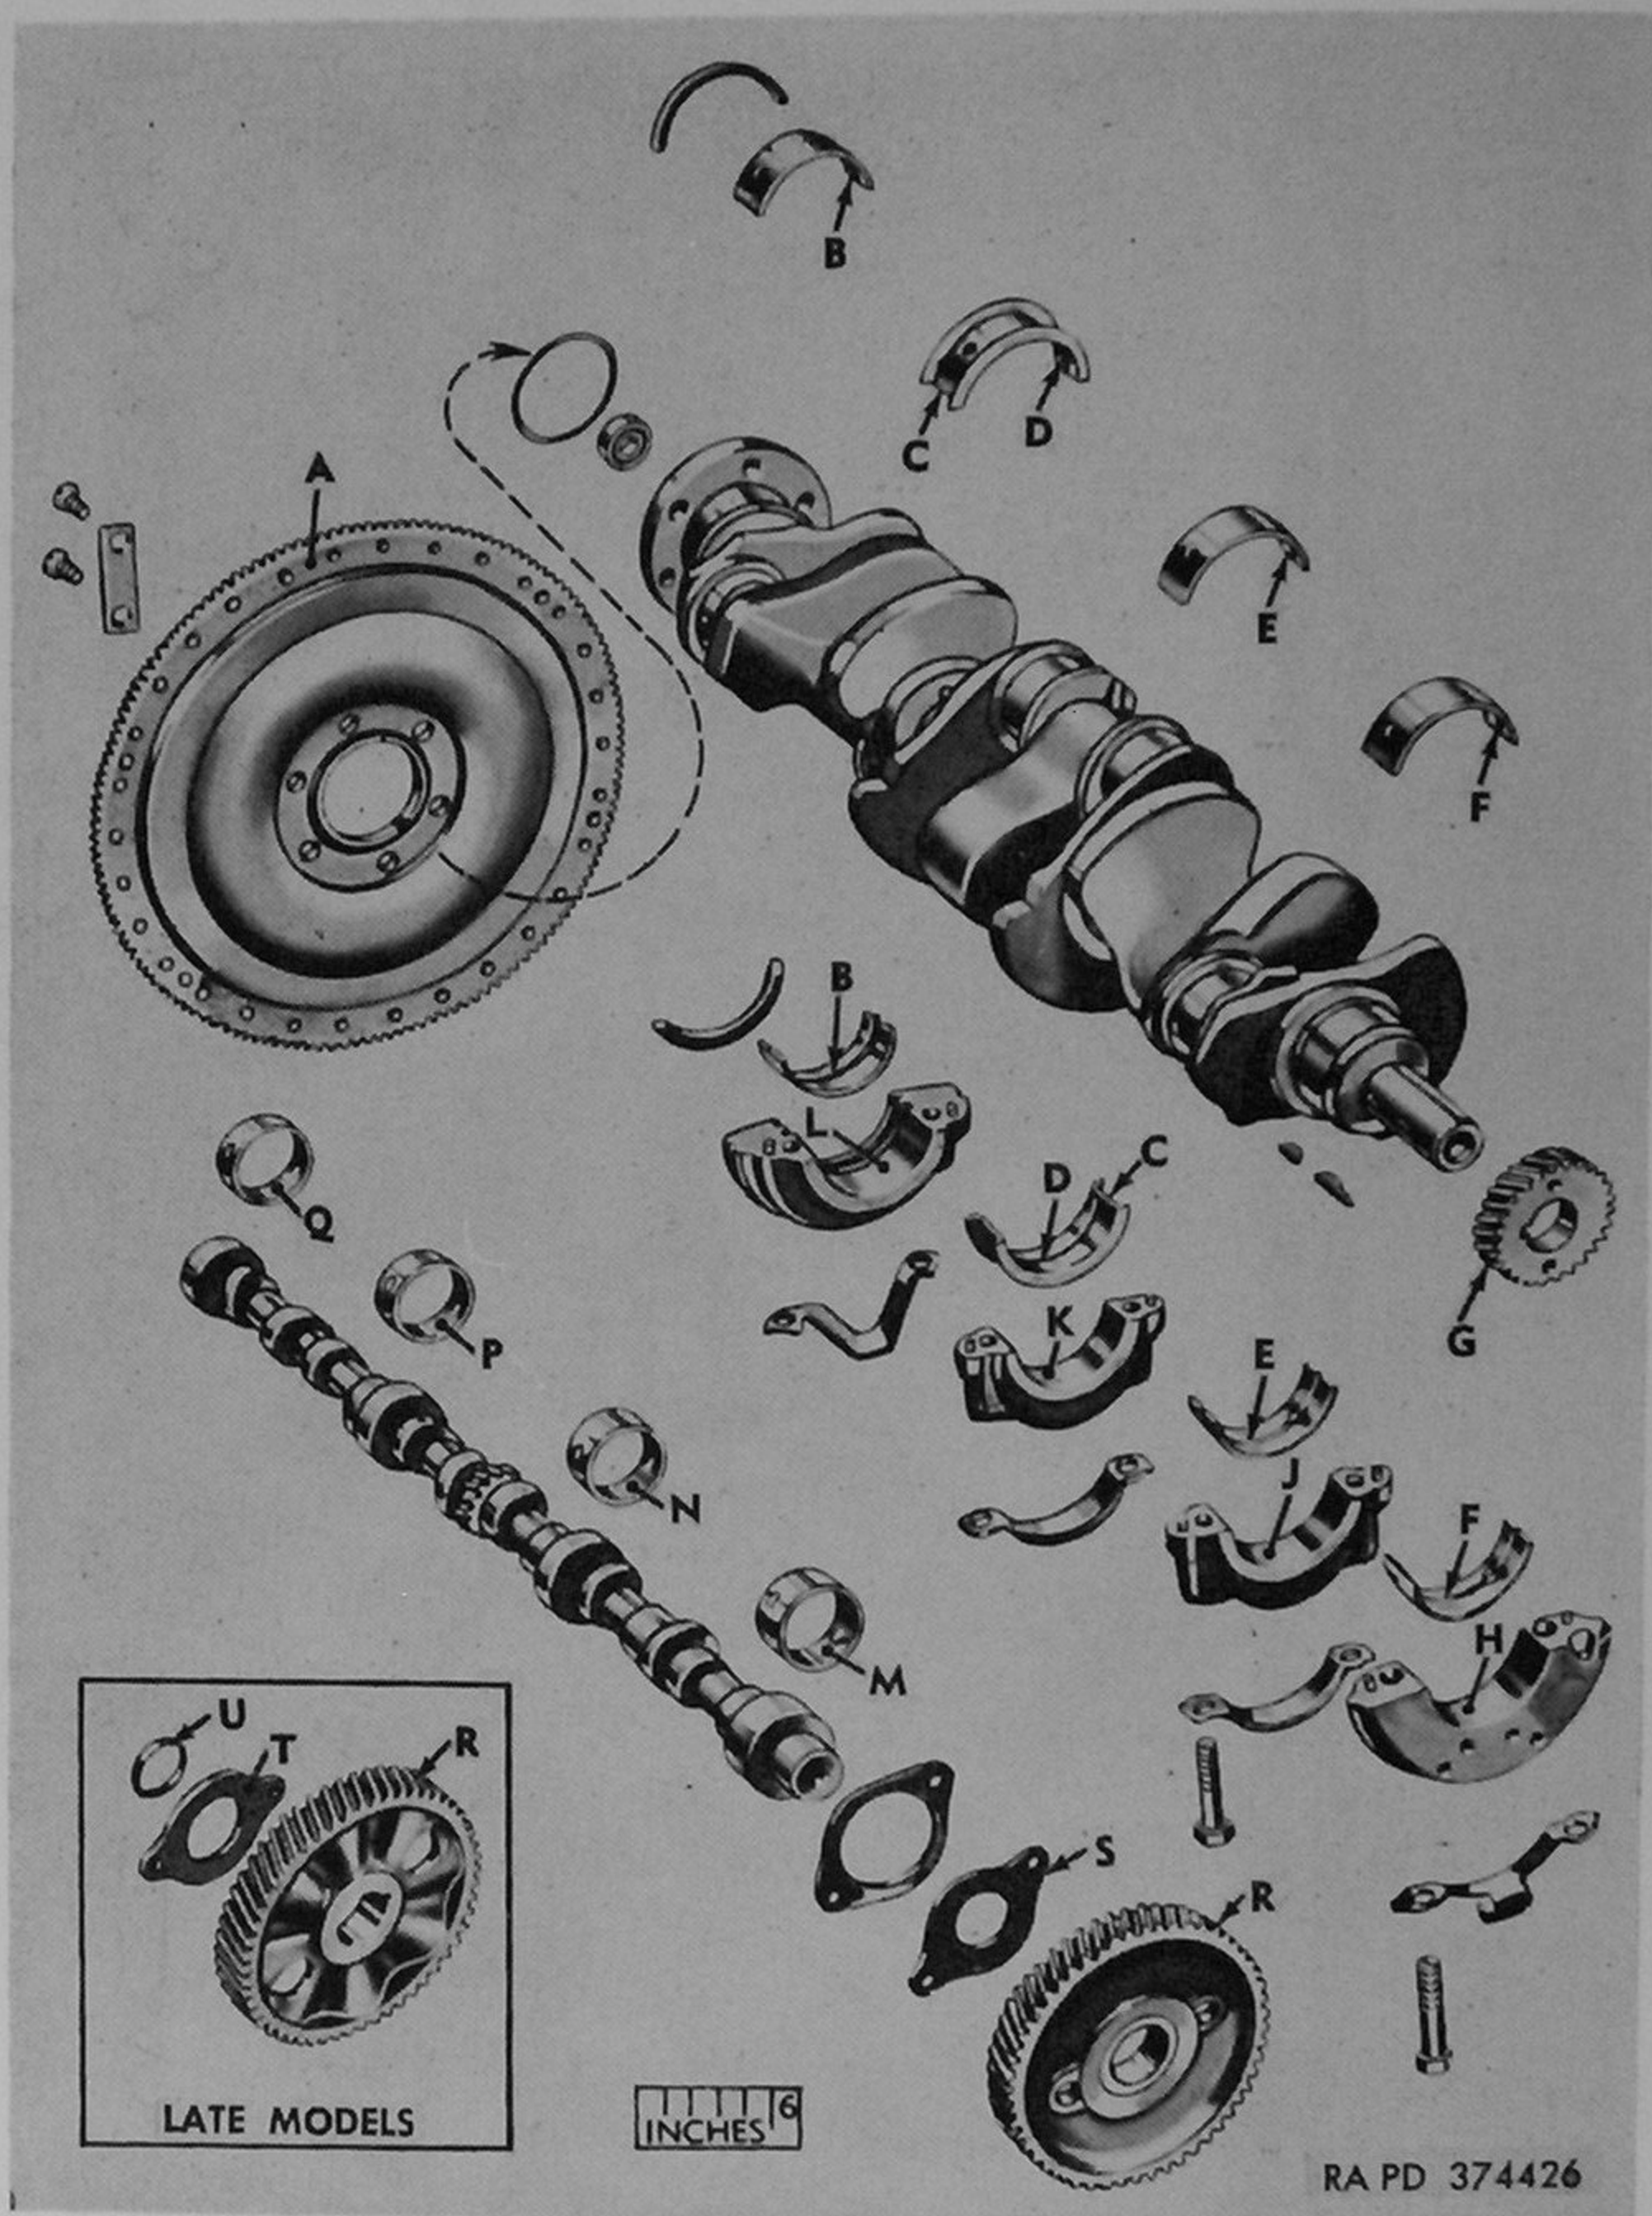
Repair and rebuild standard points of measurement for camshaft and crankshaft bearings.
